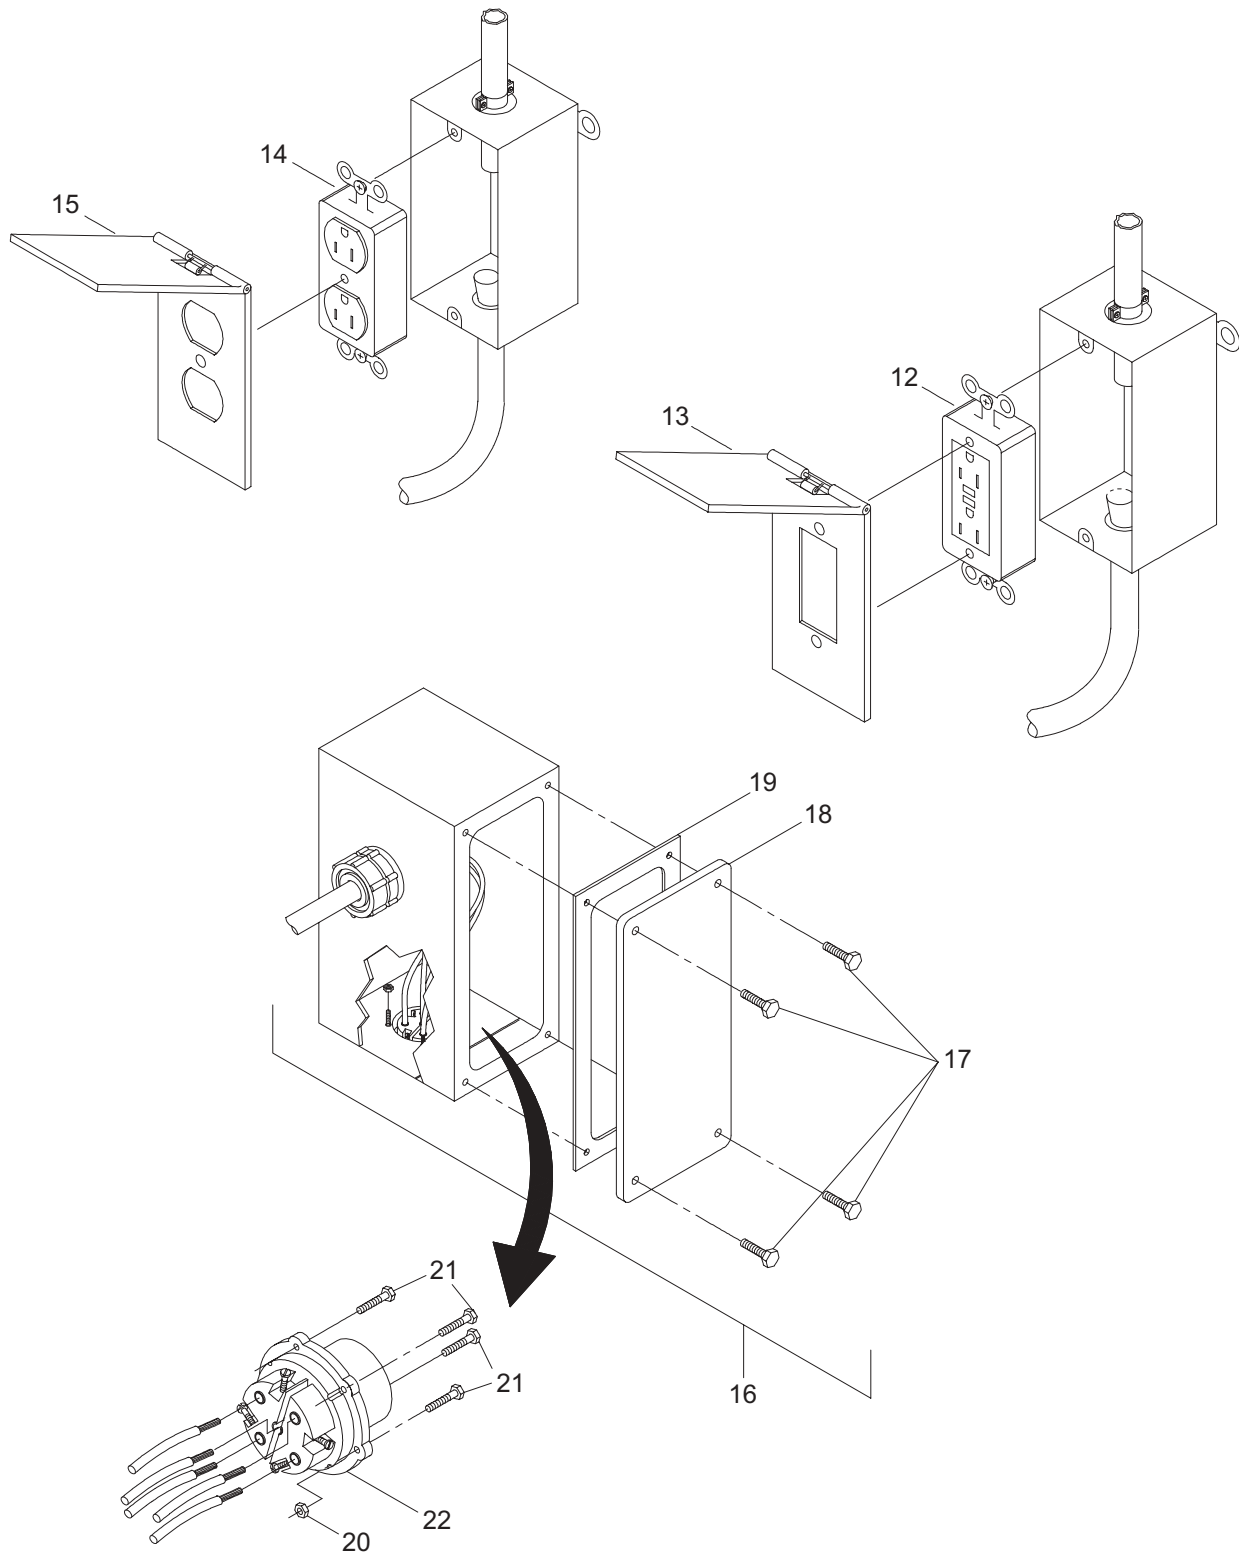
Primary Electrical Components (Sheet 2 of 2)
